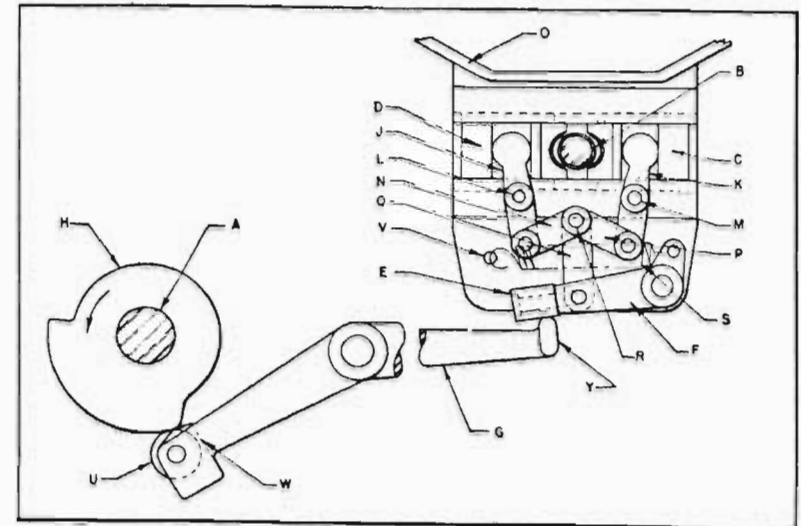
Cam *H*, Bellcrank *G*, Rocker Arm *F*, and a Toggle Joint Provide Intermittent Feed by Periodically Engaging and Disengaging Lead-screw *B* and Split Nut *C* and *D*.
